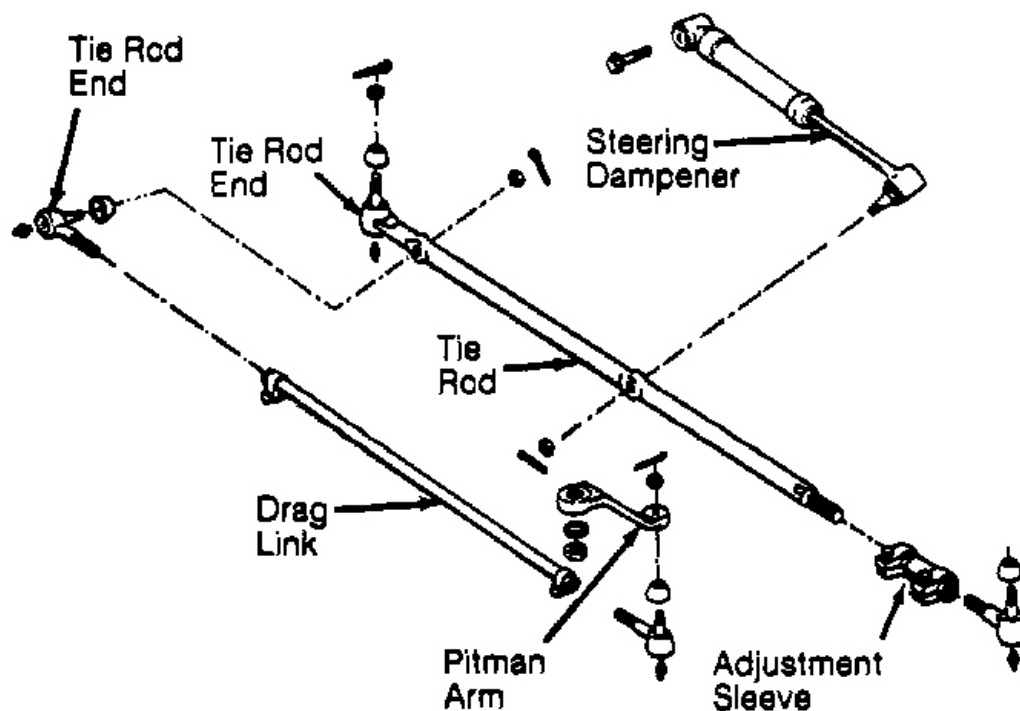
Exploded View Of Steering Linkage (Wrangler)
